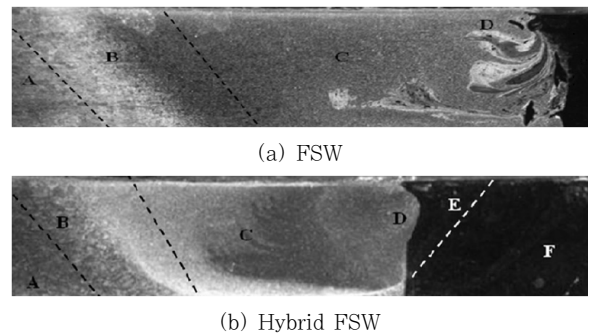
Optical microstructures of FSW and hybrid FSW welded joints : BM(A), HAZ(B), SZ(C), Weld(D), STS HAZ(E), STS BM(F)
